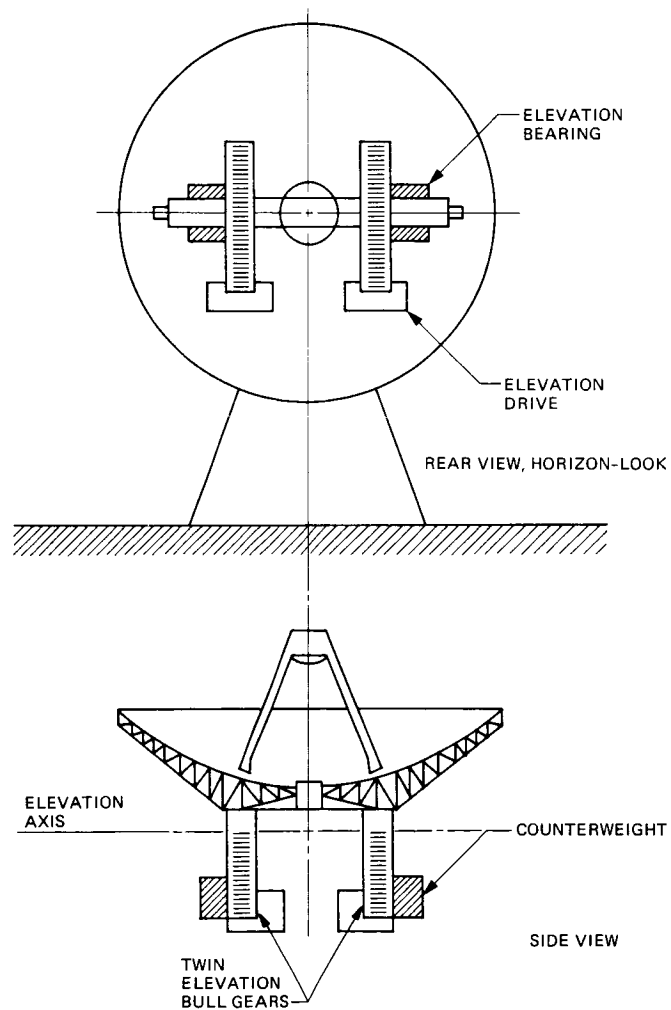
A beam waveguide antenna layout with hollow elevation bearing tube, Concept B
